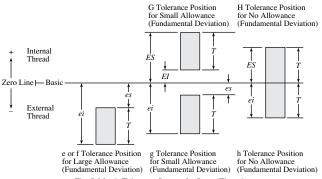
Metric Tolerance System for Screw Threads
